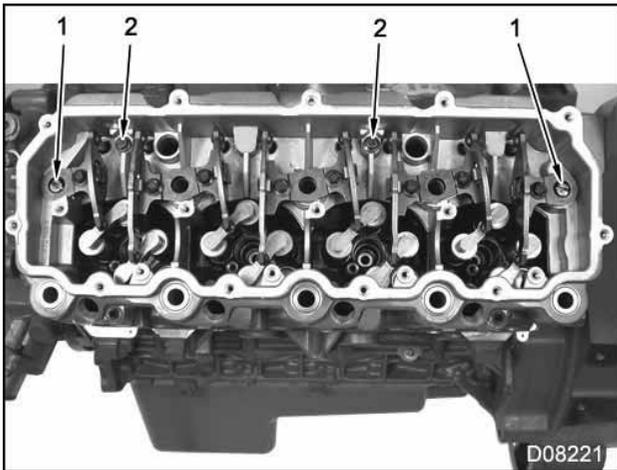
Installation of 2006 Model Year rocker arm carrier (Two M10 mounting bolts)
